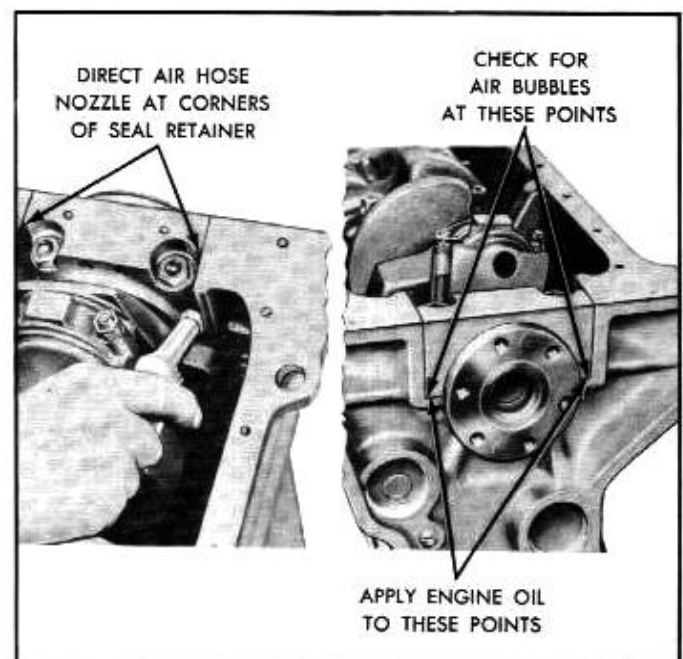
A-110—Checking Rear Oil Seals with Compressed Air—Typical
